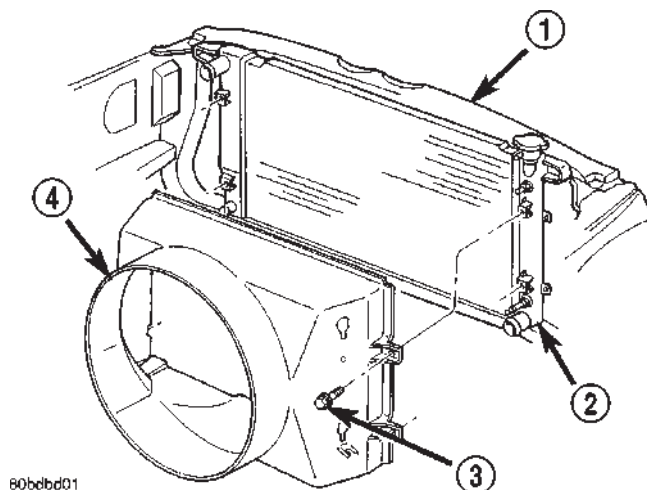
Fan Shroud Mounting—3.9L/5.2L/5.9L Engines
